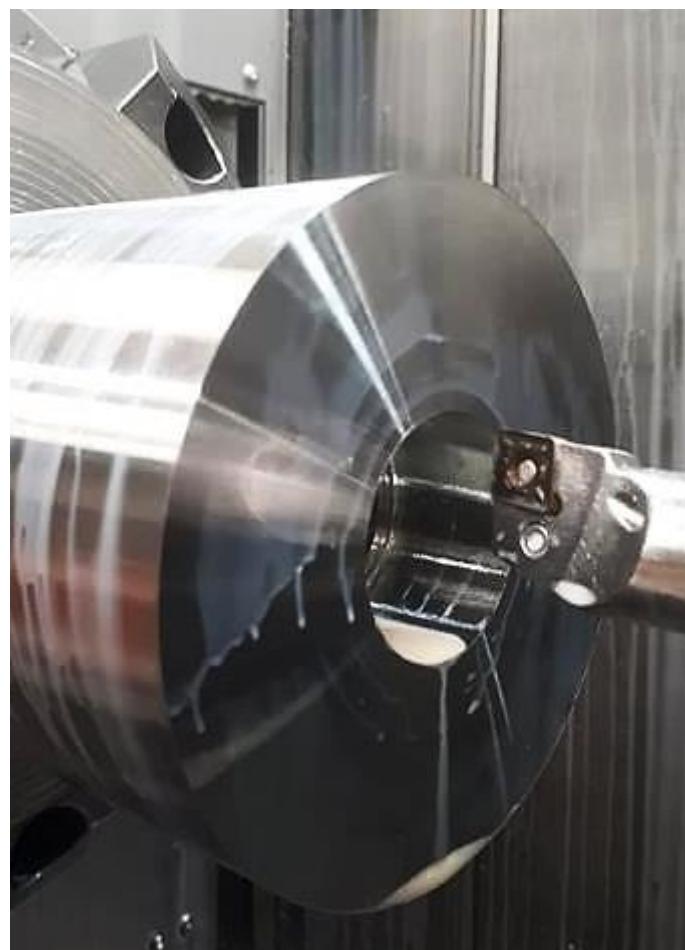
Workpiece and tool during experimentation of boring.
